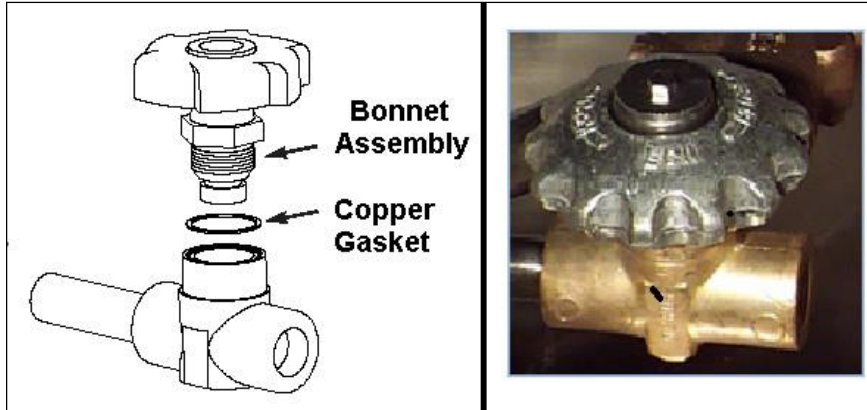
Fuel (Liquid and Vapor) Shut-off Valve
